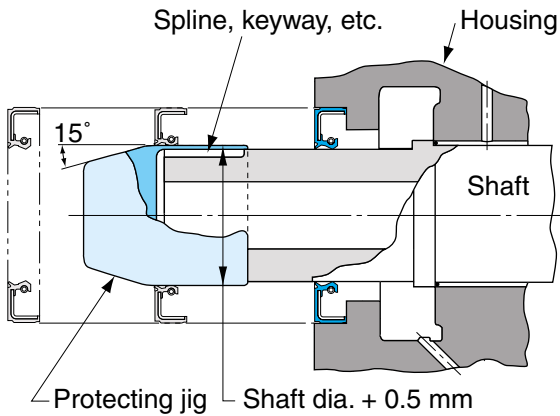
Seal protecting jig for spline, keyway, holes on shaft
